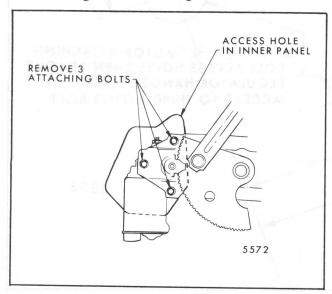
Front Door Electric Window Motor Viewed from Door Outer Panel Side - "A"Styles
